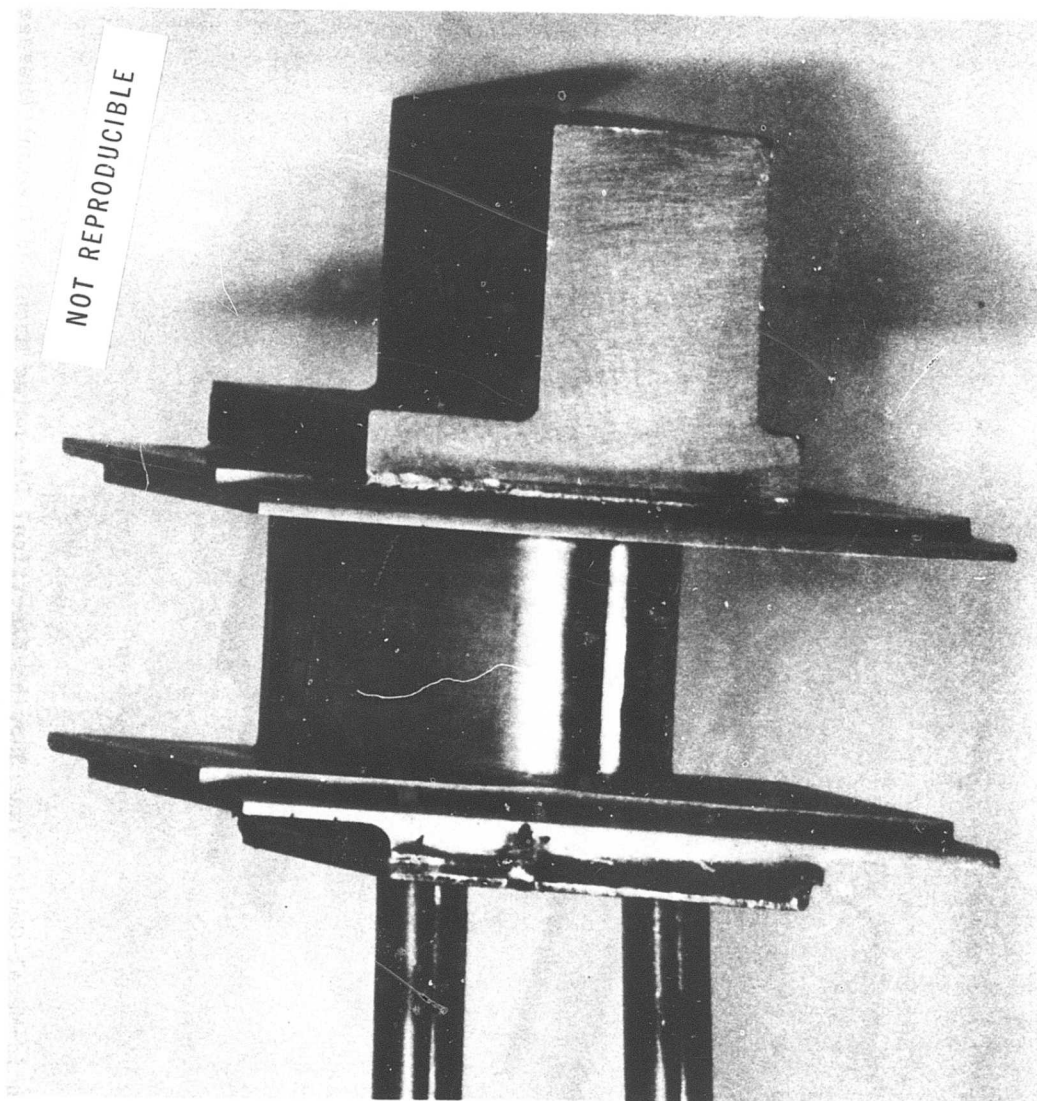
Liquid-Metal-Cooled Vane Electron Beam Welded Assembly.
